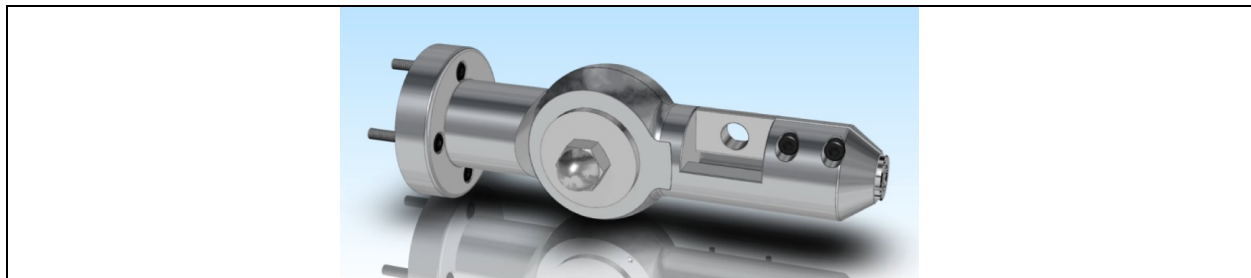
Aluminum fixtures for ACUT probes with adjustable angle of attack.
